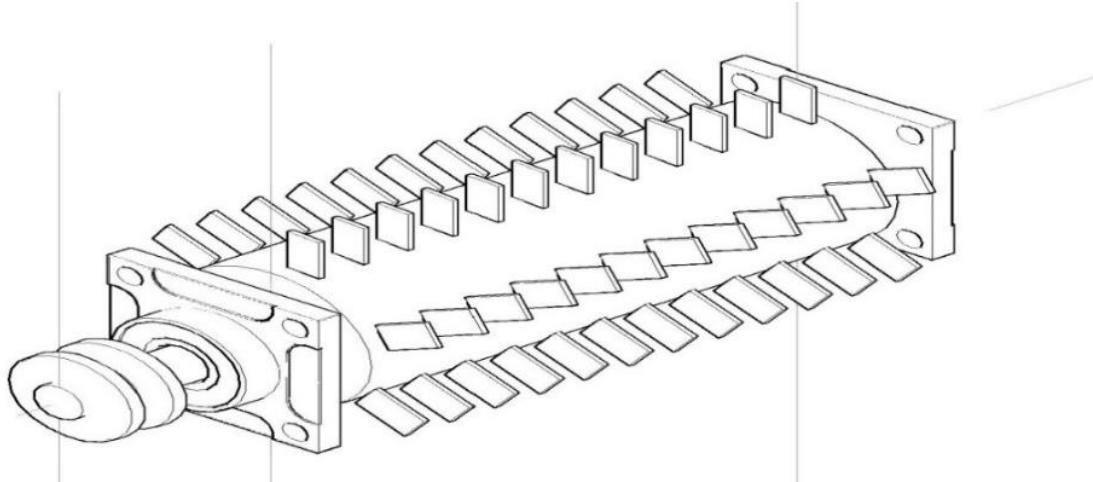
Shredder shaft carrying the cylinder and blades with a single groove pulley and two bearings (A and B)
